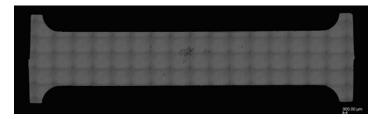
Example of an inner casting defect shown in an X-Ray picture.[3]
